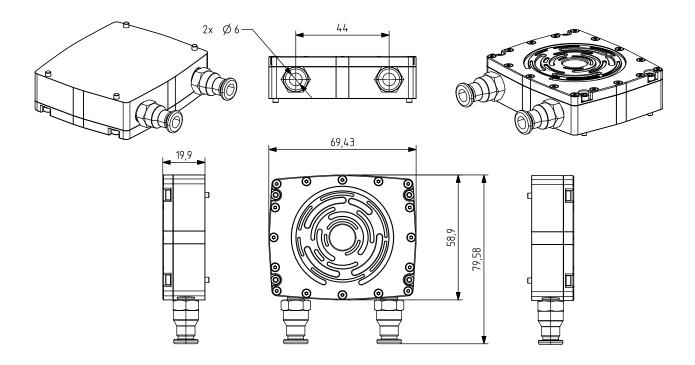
CB-X8G3-WAT-COOLER-KIT drawing
